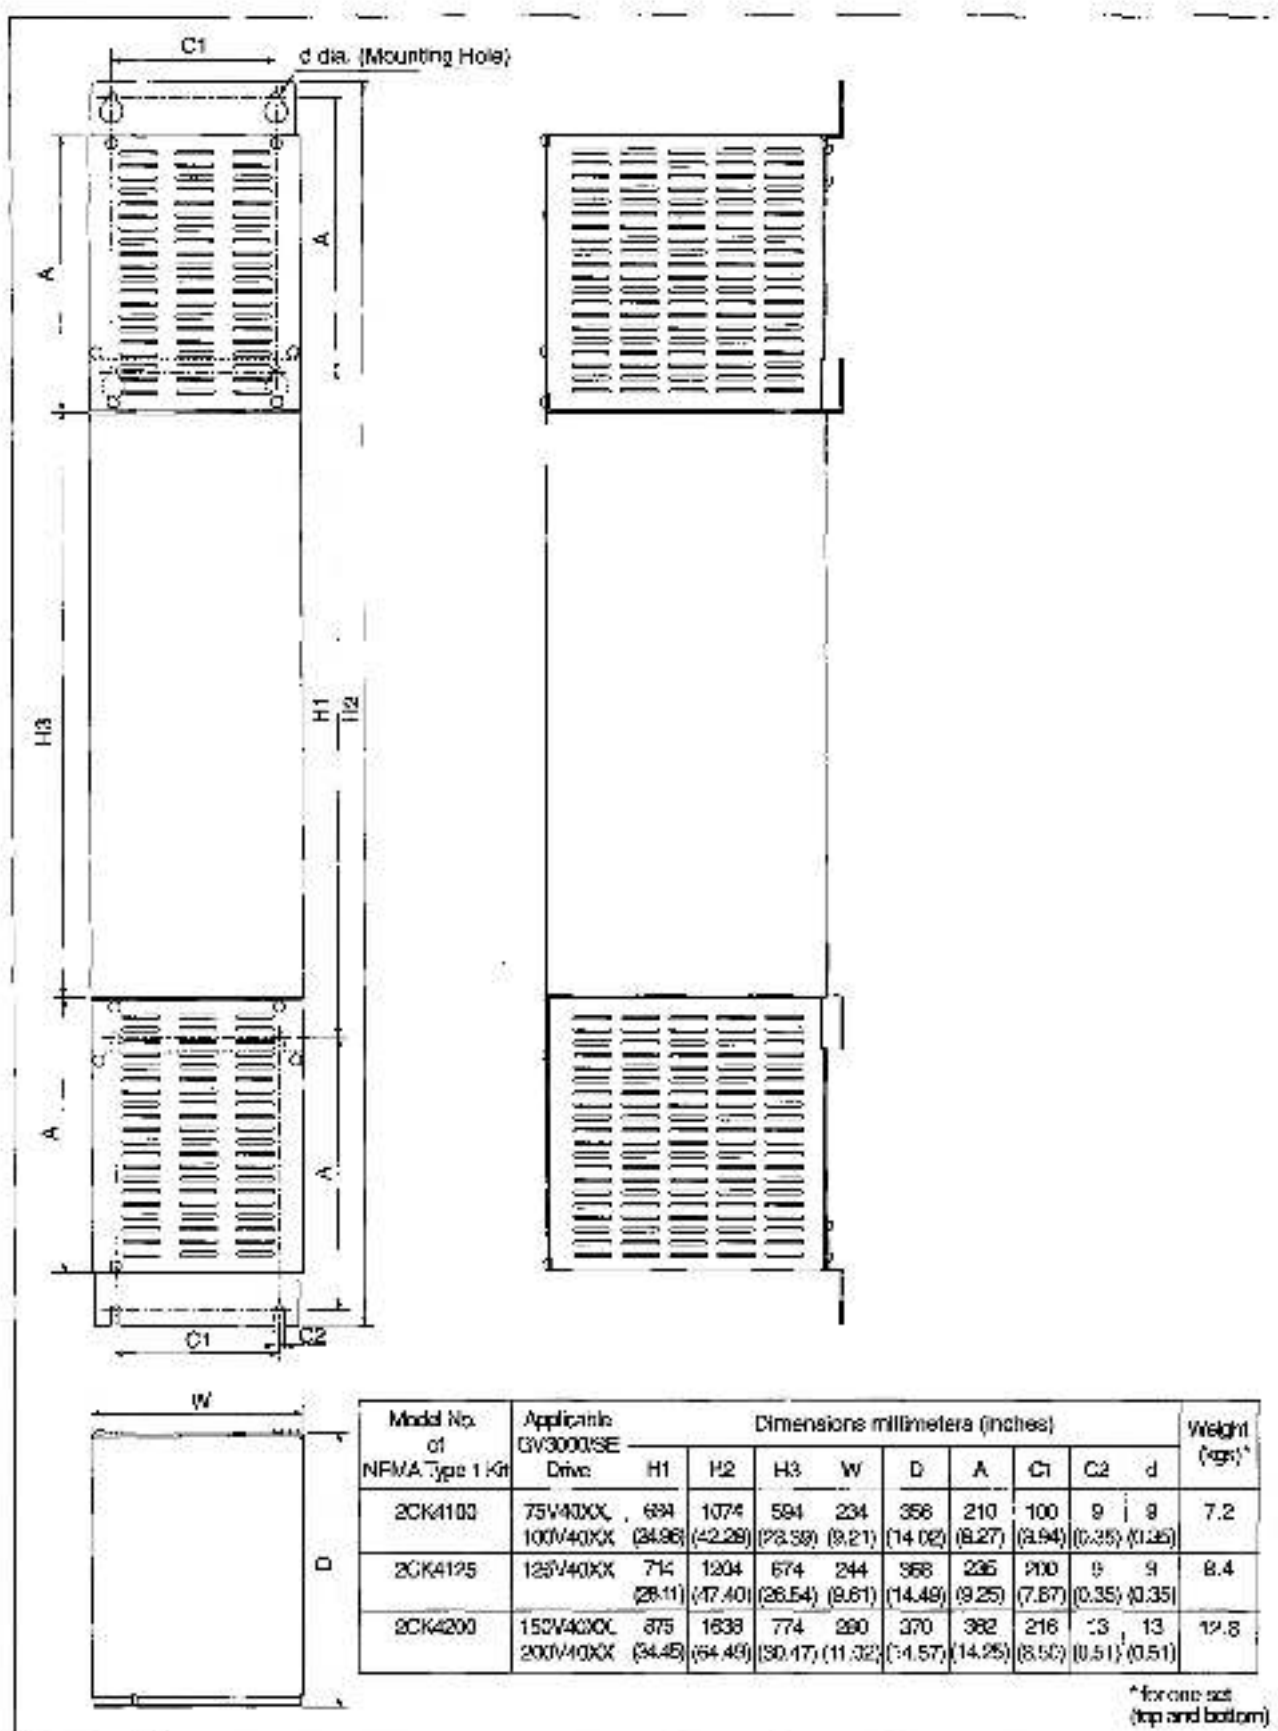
Outline Dimensions of NEMA Type 1 Kit
